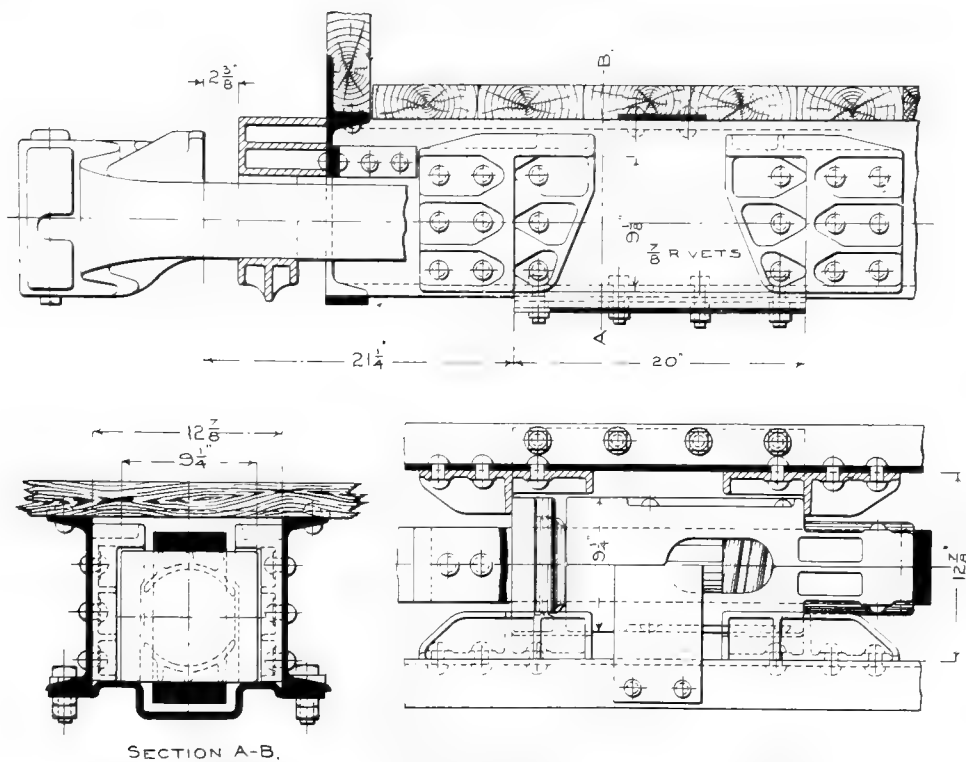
McCord Draft Gear, Type D, for Steel Underframe Freight Cars. McCord & Company.
